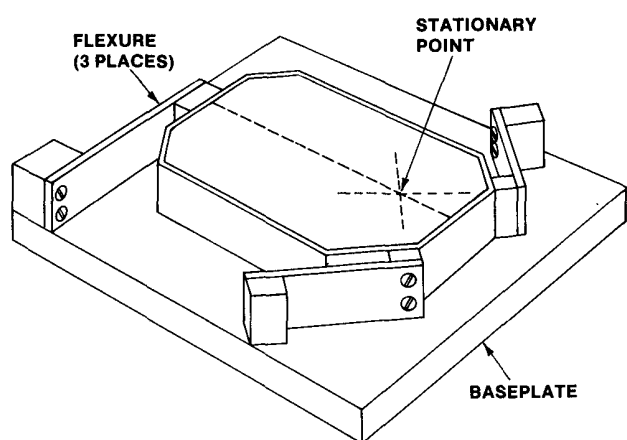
Conceptual sketch of a flexure-mounted rectangular flat mirror subassembly.
